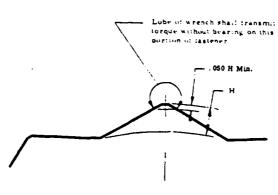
INTERNAL WRENCH ENGAGEMENT
